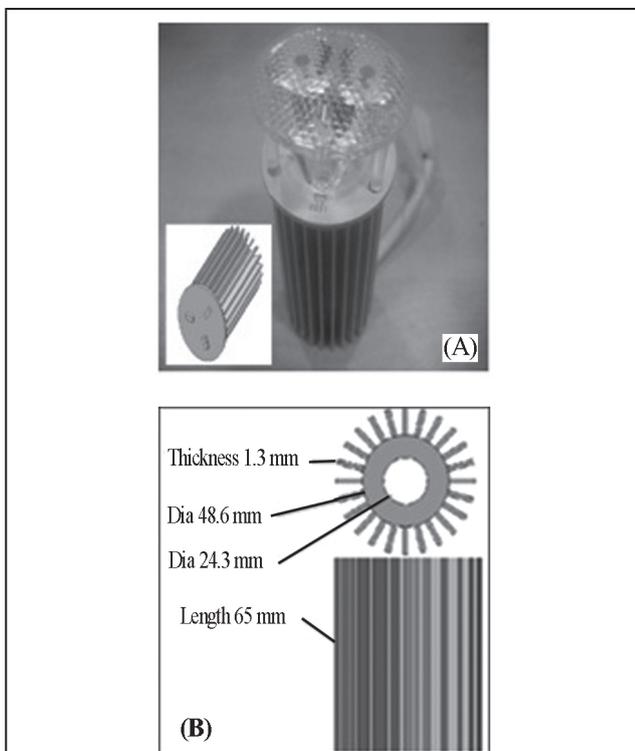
MR16 AND 9 W DOWN LIGHT (A) IMAGE OF THE LED (B) DIMENSIONS OF THE ALUMINUM HEAT SINK
